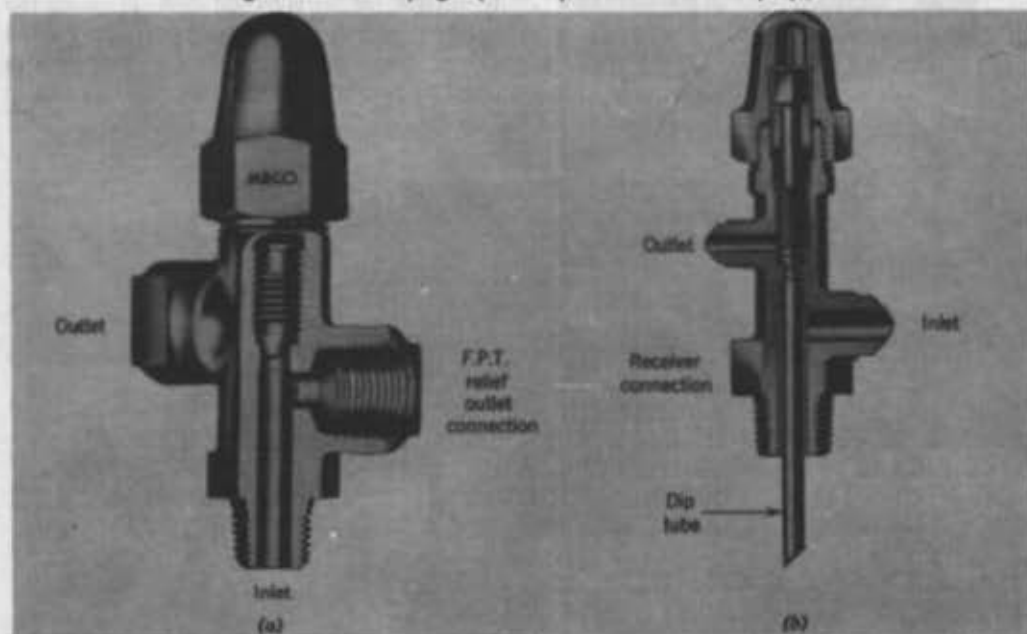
Receiver tank valves. (a) Angle type with pressure relief outlet (nonbackseating). (b) Angle type with dip tube (nonbackseating). (Courtesy Mueller Brass Company.)
